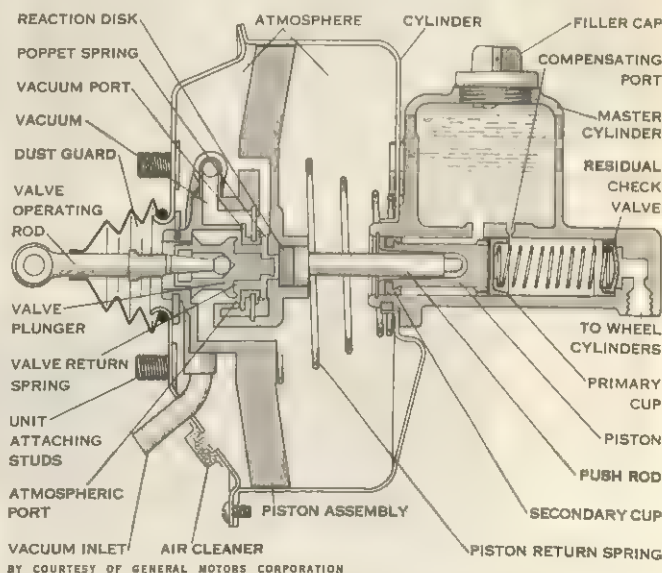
CROSS SECTION OF POWER BRAKE MASTER CYLINDER
